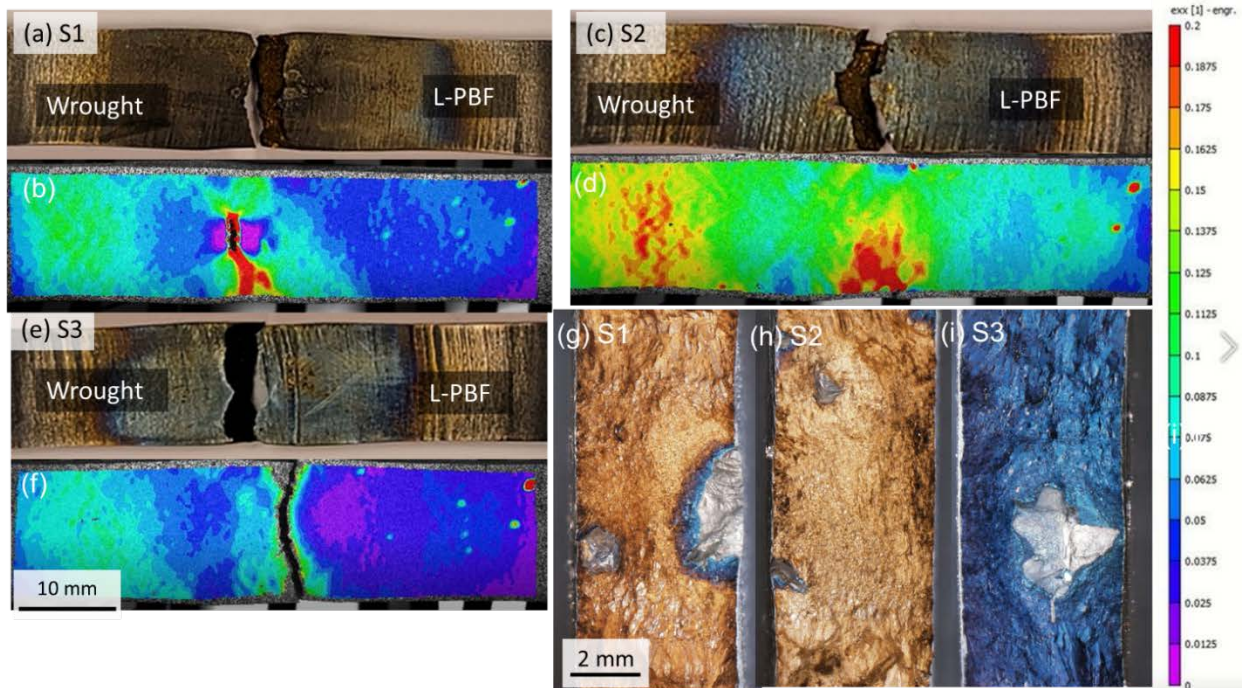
720°C tensile test DIC results (a–b) F1 fracture location DIC engineering strain map, (c–d) F2 fracture location DIC engineering strain map, (e–f) F3 fracture location DIC engineering strain map, and (g–i) respective fracture surfaces
